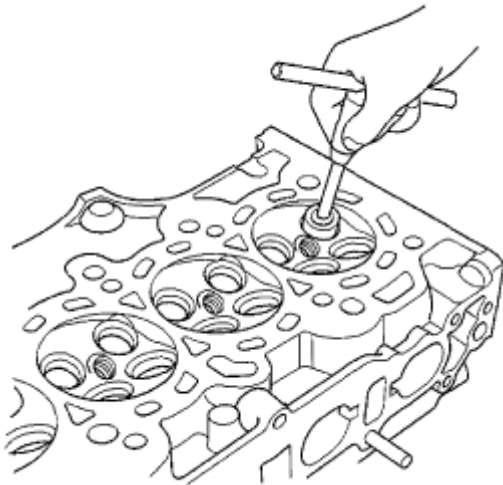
Renewing Valve Seats In Cylinder Head Using Valve Seat Cutter
